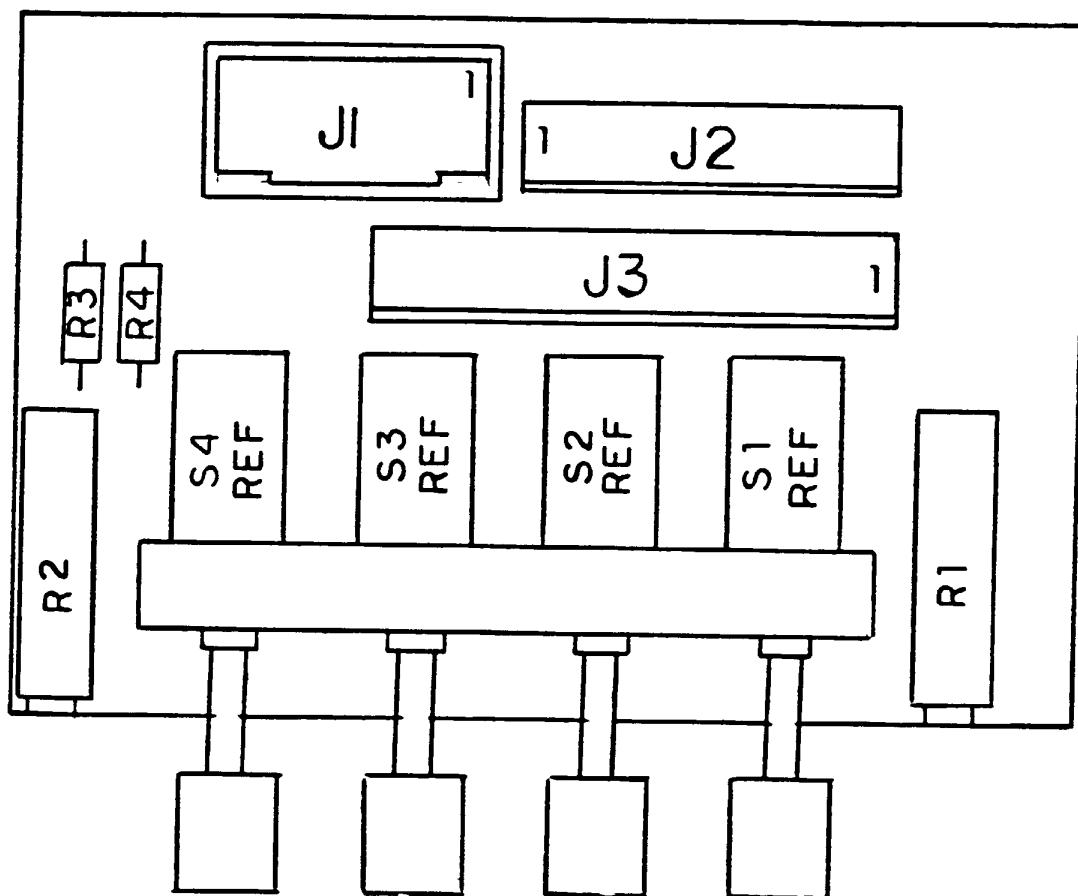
Front Panel Meter Board A13A3 Component Location Diagram (10073-2300)
